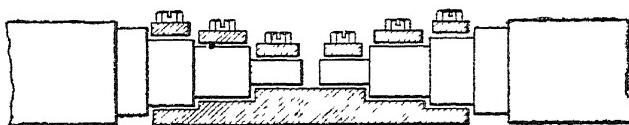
JOINT FOR ALUMINIUM CABLES.
